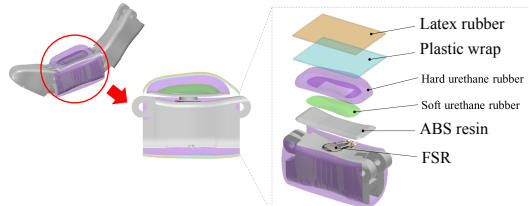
Cross-section view of a finger link with skin and its multilayer structure.
